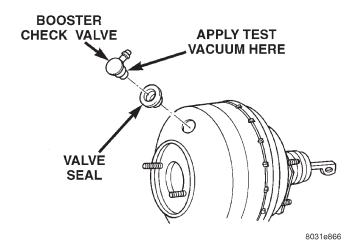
Vacuum Check Valve And Seal FRONT DISC BRAKE ROTOR
